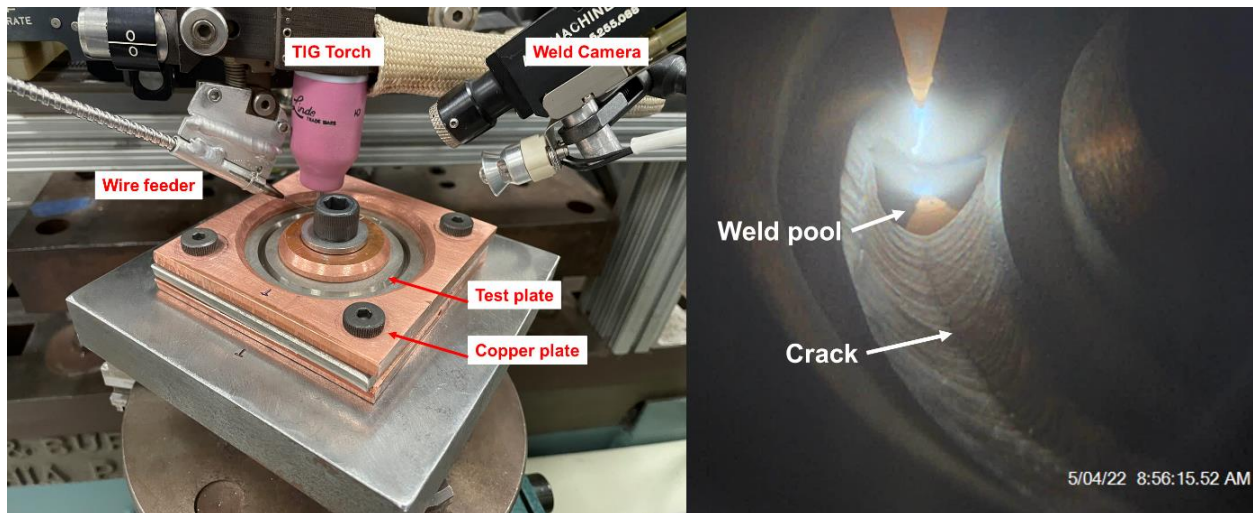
Circular patch test setup built at ORNL. The camera image on right shows centerline solidification cracking occurred during welding.
